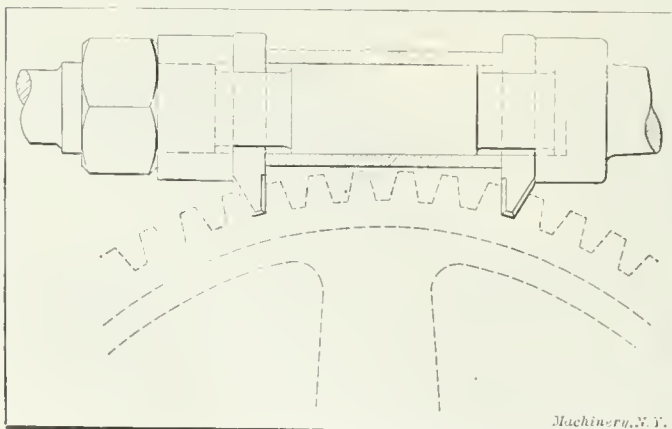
Showing Double Fly-cutter used for Cutting Teeth in Hindley Worm-wheels on S. & S. Hobbing Machine
